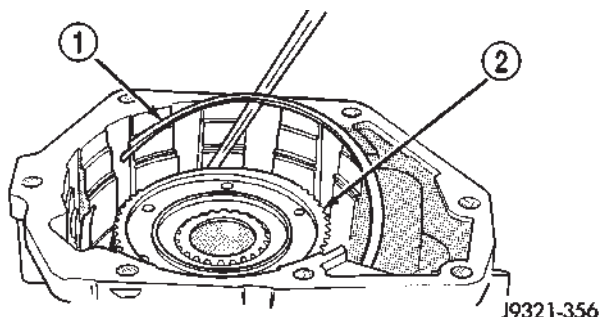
Overdrive Clutch Reaction Snap-Ring Removal
